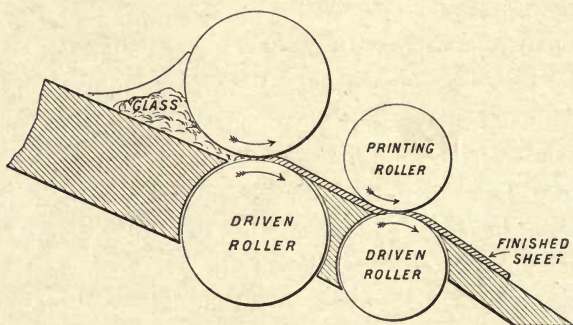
Sectional diagram of machine for rolling "figured rolled" plate-glass.
